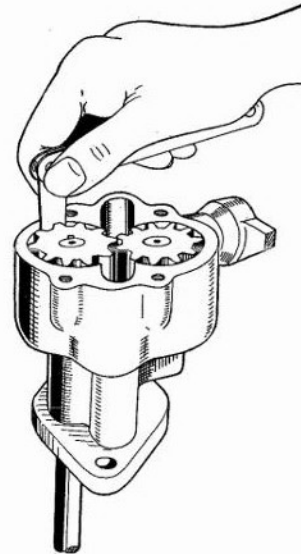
Checking the oil pump gear side clearance, using a feeler gauge
